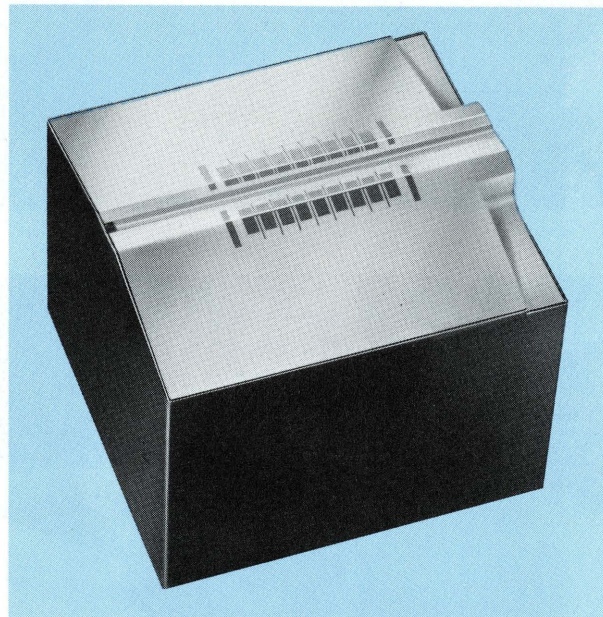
Potter Standard 9-channel Read/Write Head Assembly.
